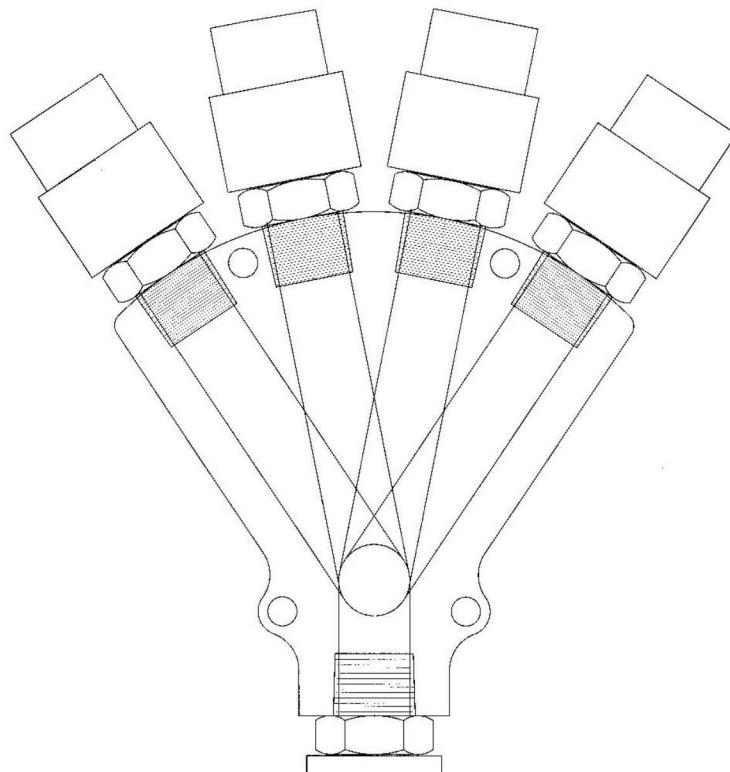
I55US Wind Filter Manifold Drawing
